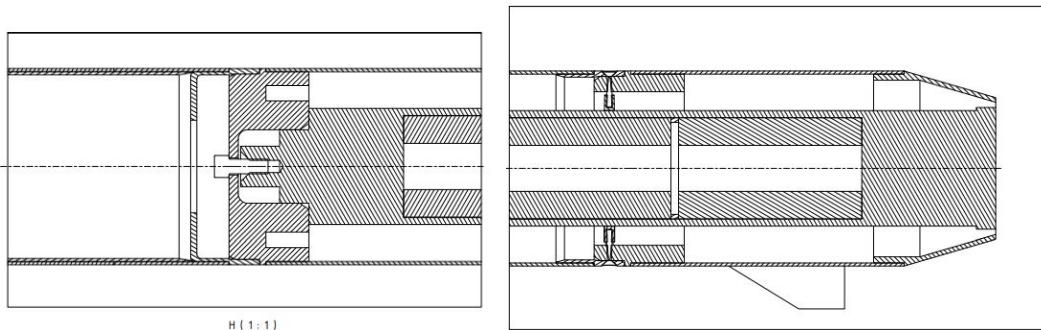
H and 4.J - Cut view of motor mount the fin mount section.
